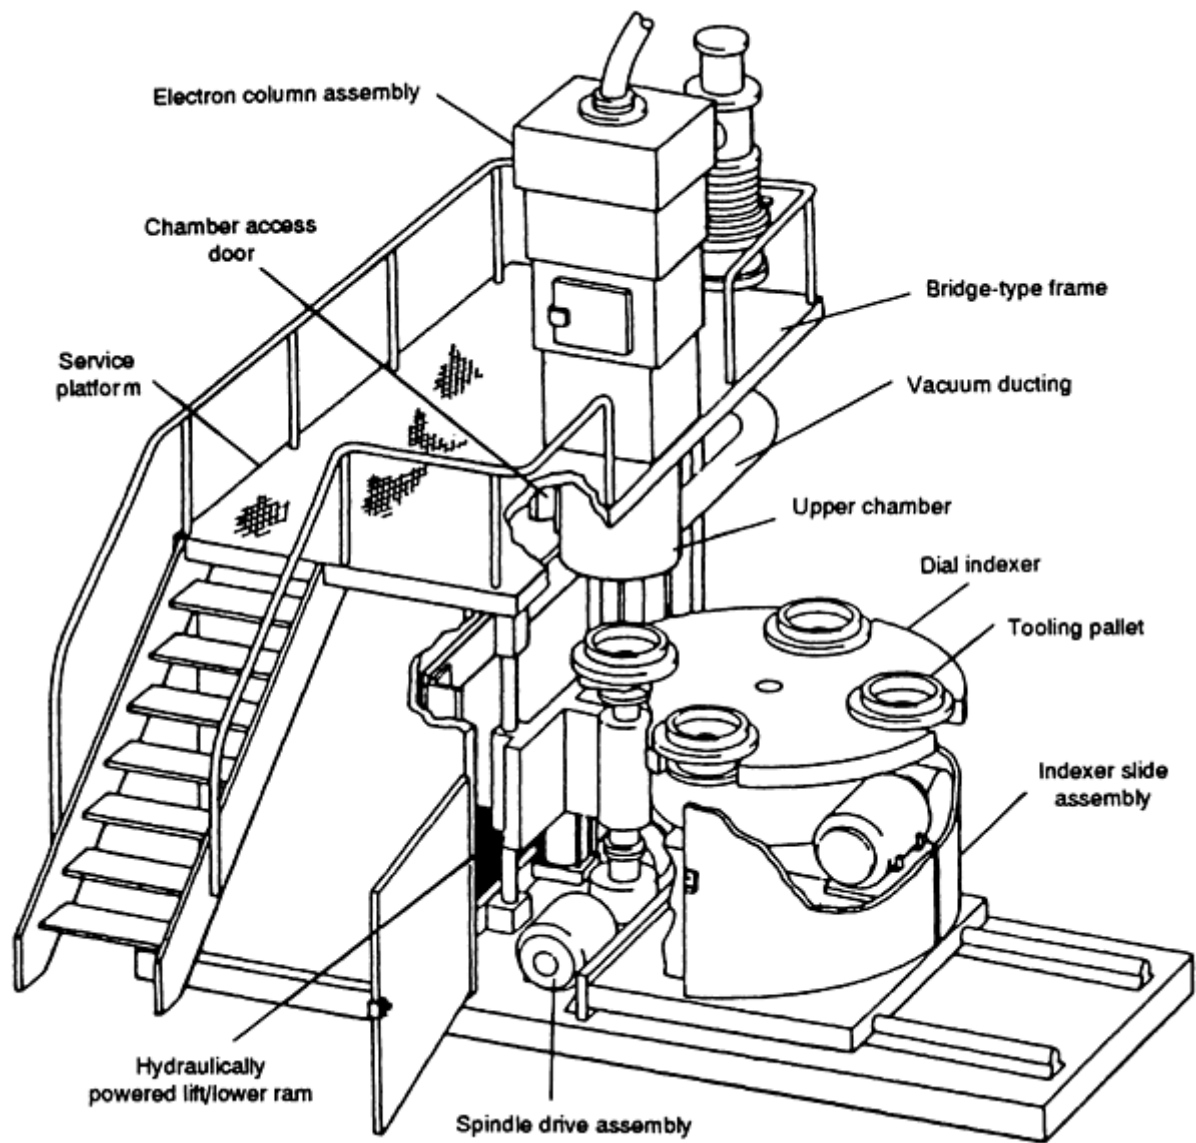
SCHEMATIC SHOWING A CUTAWAY VIEW OF A DIAL TABLE DEVICE INCORPORATED INTO AN EBW-(MV/PV) SYSTEM TO PROVIDE INDEXING OF WORK STATION INTO WELDING AREA
